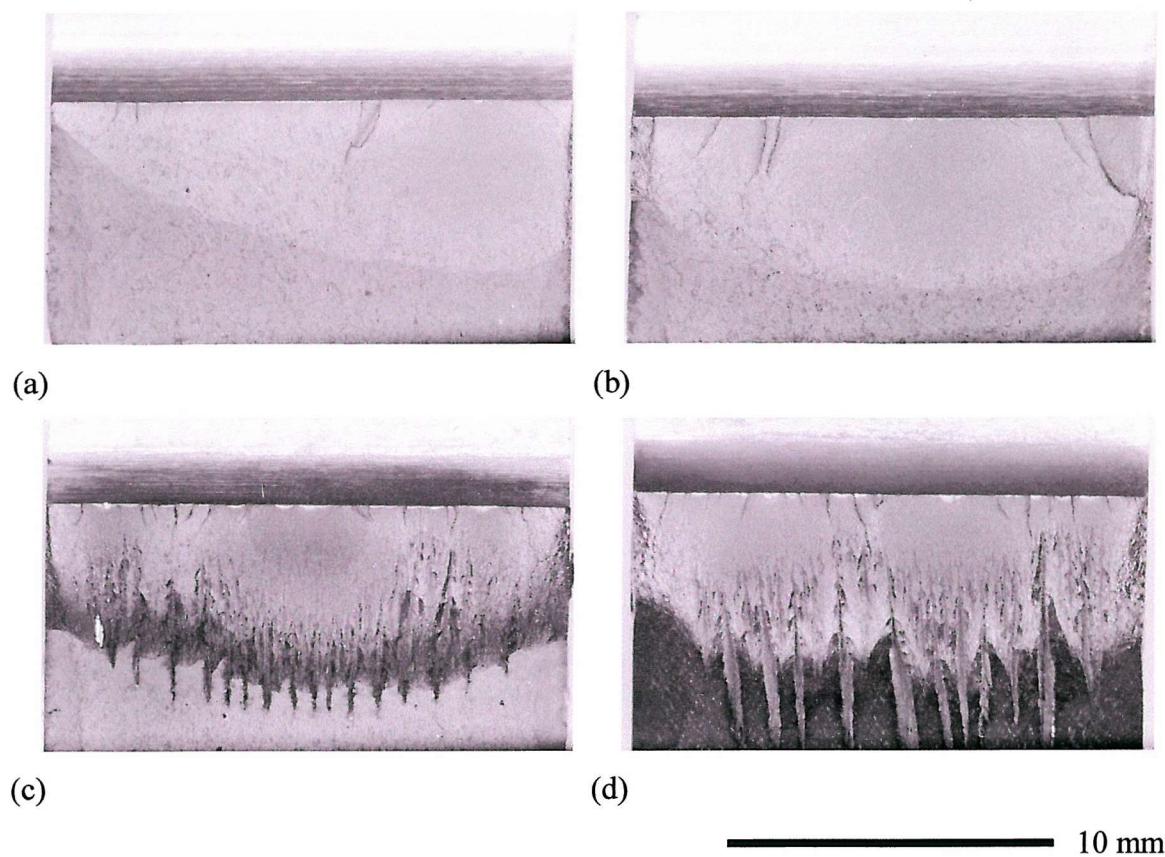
Macro photographs of fractured U-notch specimens. (a) Test B600-790-1-01; (b) Test B600-790-1-02; (c) Test A600-750-20-01 (20 second dwell); (d) Test A600-750-30-01 (30 second dwell).
